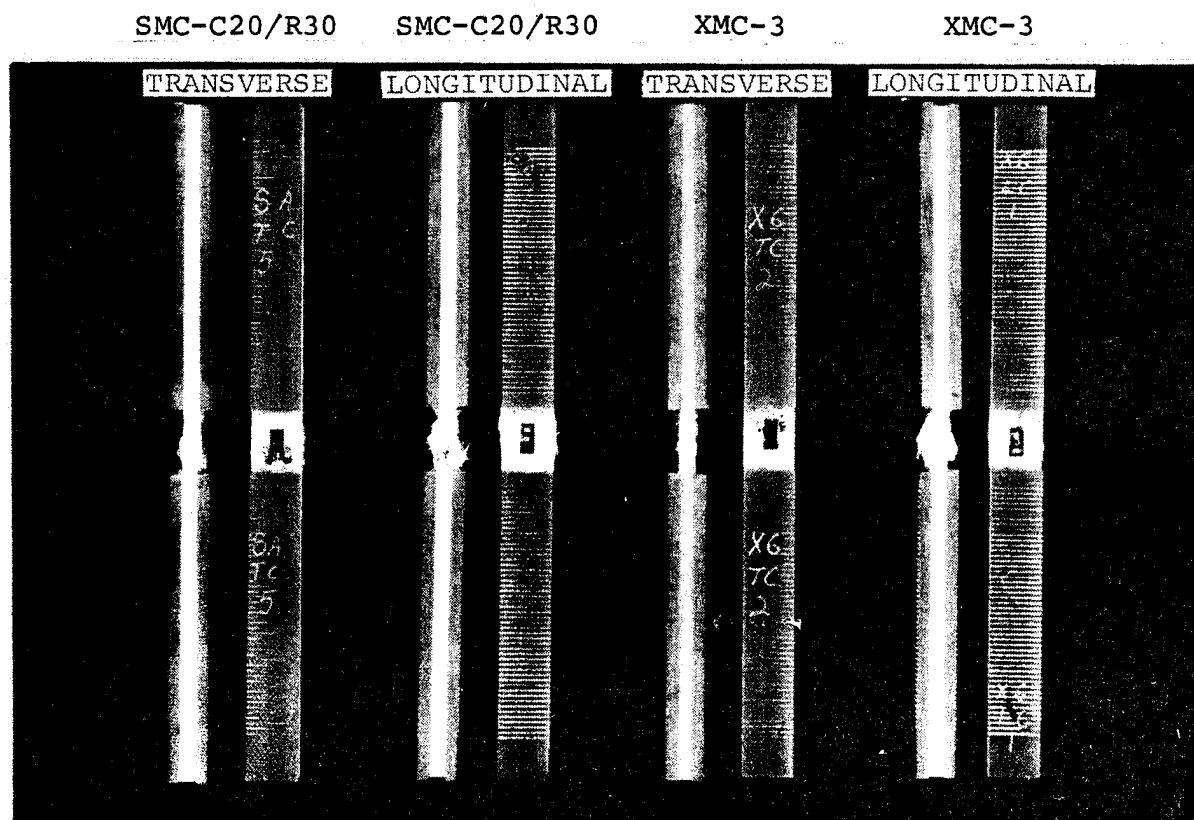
FRACTURED COMPRESSIVE SPECIMENS
